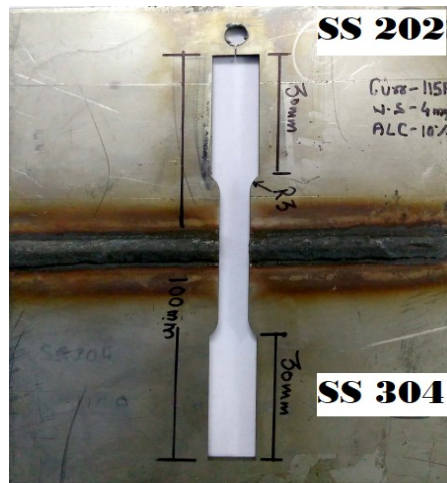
Welded Joint from which the tensile specimen is cut using EDM
